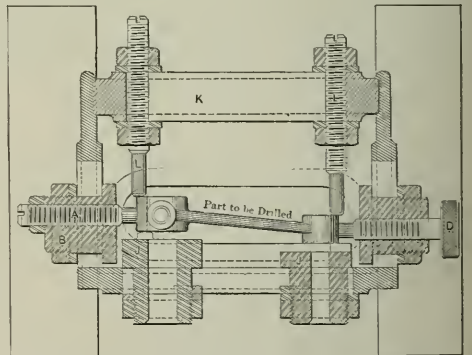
Vertical Section through Cover Screws and Jig Bushings.
